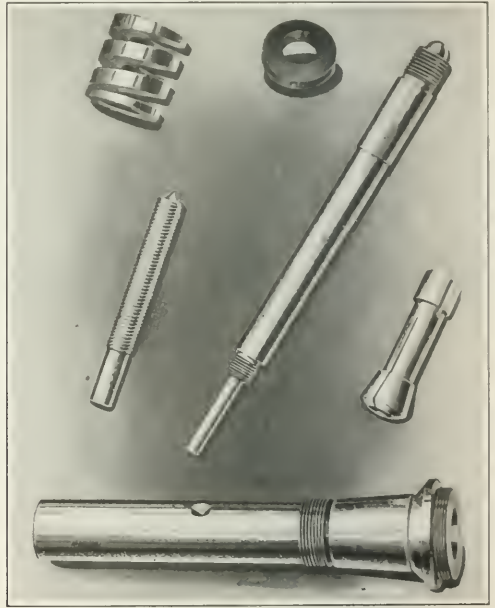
Close View of Cutting Tool, Collet and Spindle
